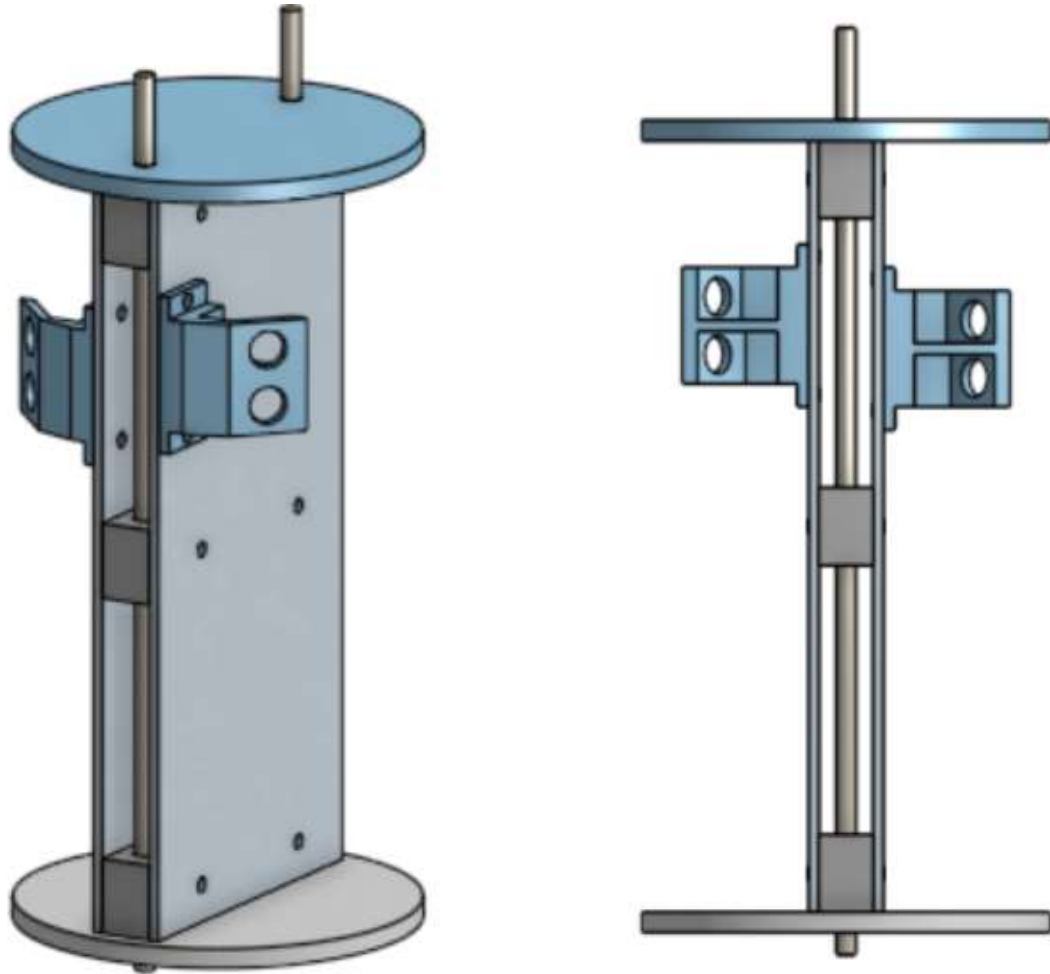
Ebay assembly without electronics or upper and lower bulkheads
